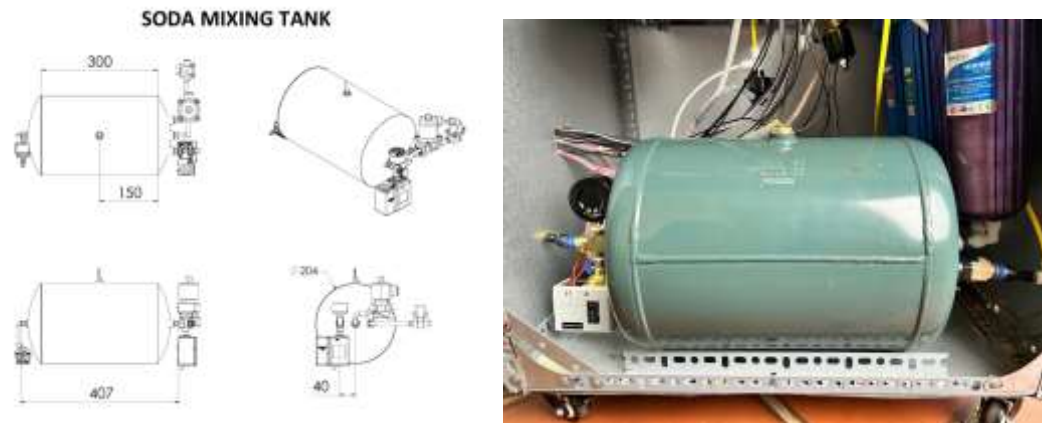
Detail drawing (left) and actual assembly (right) of the carbonator
